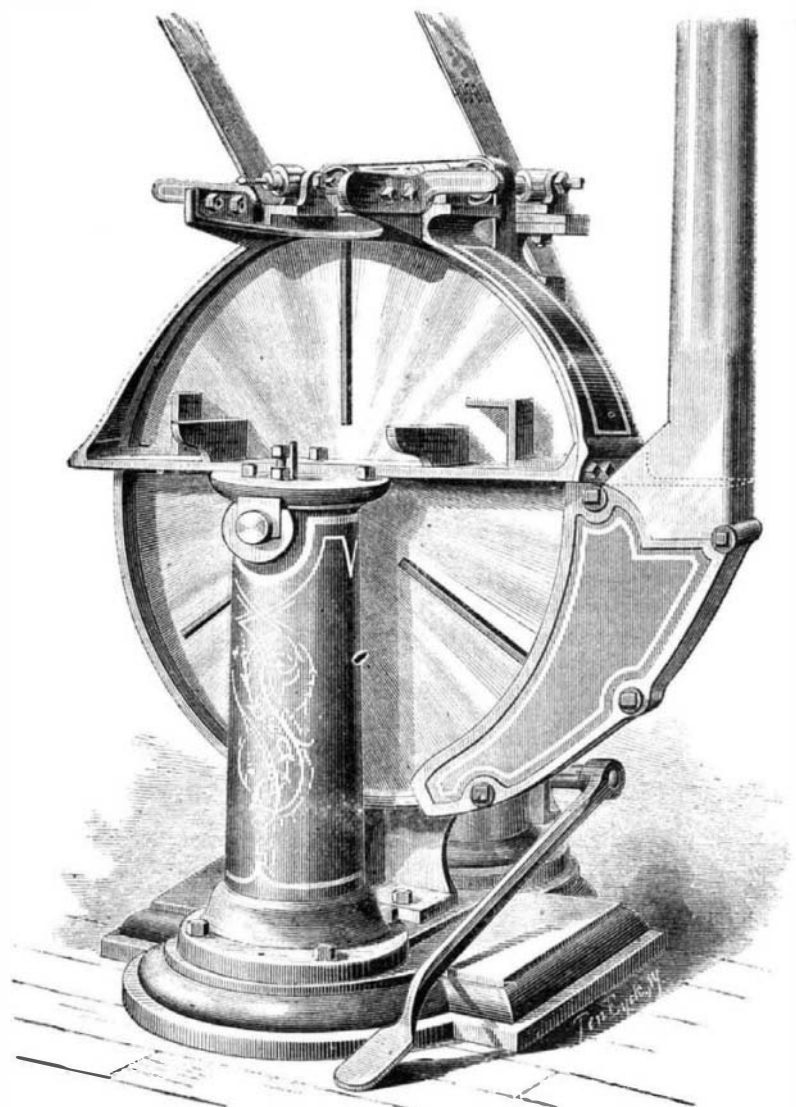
BARREL HEAD JOINTING AND BORING MACHINE.
